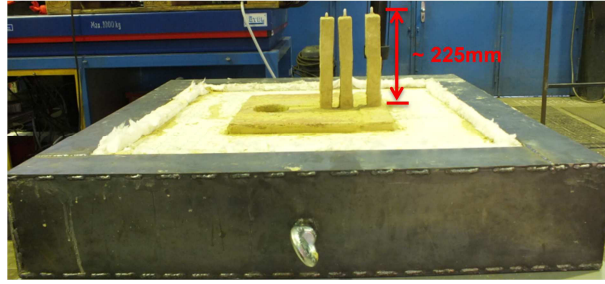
Mould cover instrumented with thermocouples (Type S) and refractor protection tubes, B1
